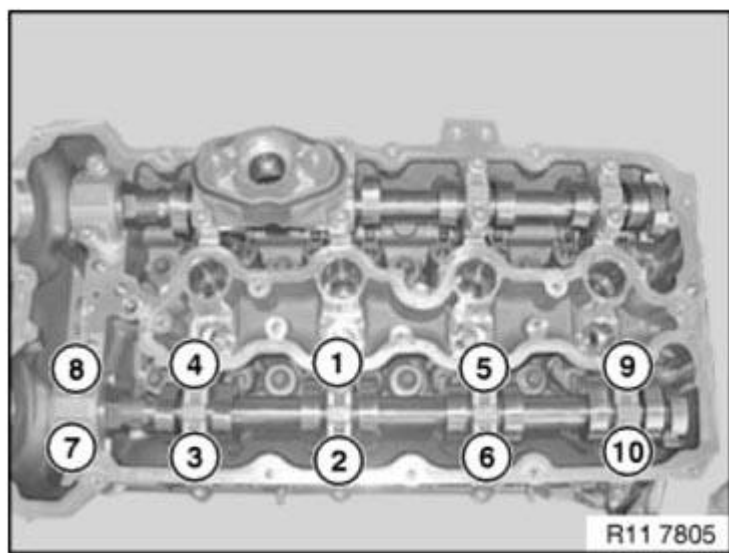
Identifying Camshaft Bearings Bolts Tightening Sequence
